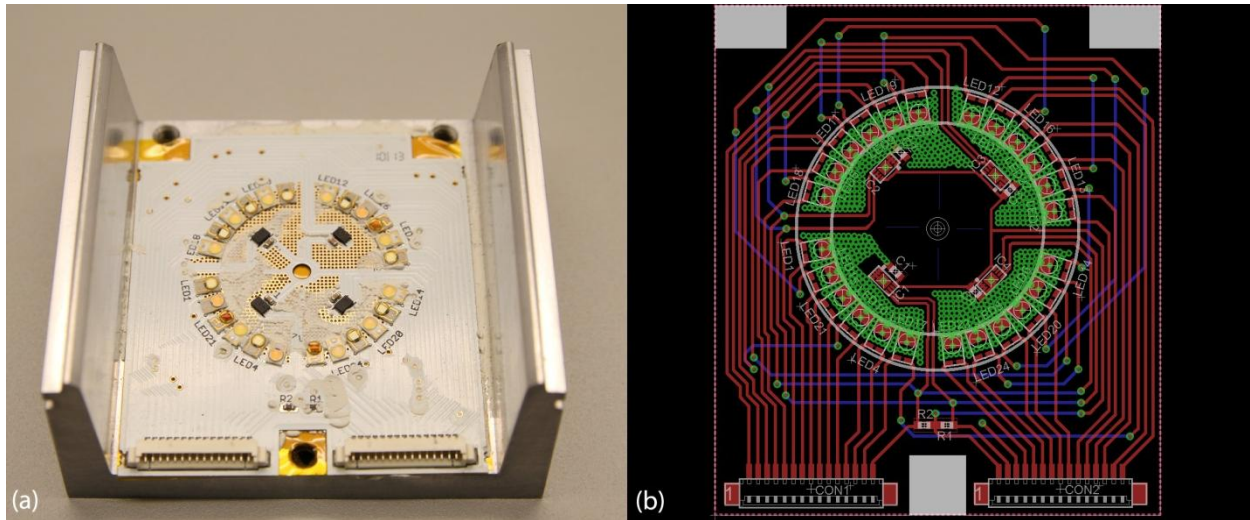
LED PCB. (a) Finished board mounted on an aluminium heatspreader with isolating Kapton foil (yellow) and (b) PCB design with top layer in red, bottom layer in blue and (thermal) vias in green. Note the 4 black temperature sensors in (a).
